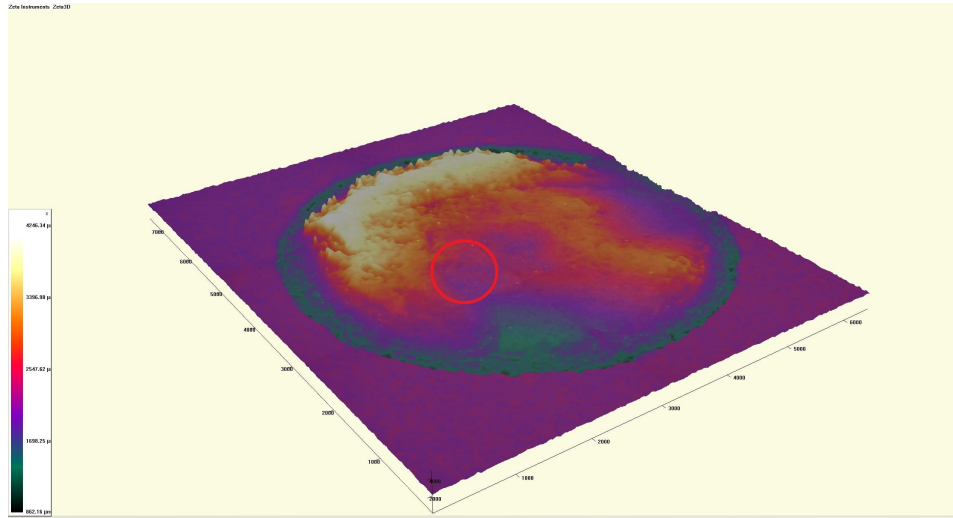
Pore zone selection from fracture surface of a 95% porosity, 150°C specimen.
